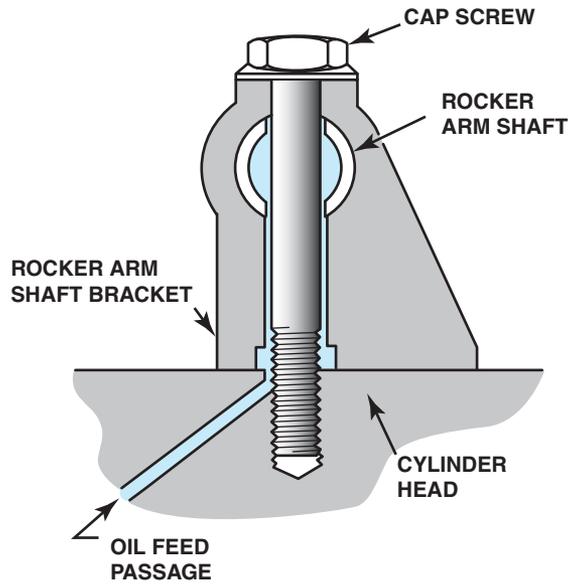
Clearance around the rocker shaft bracket cap screw makes a passage for oil to get into the rocker shaft. (Courtesy of Dana Corporation)
